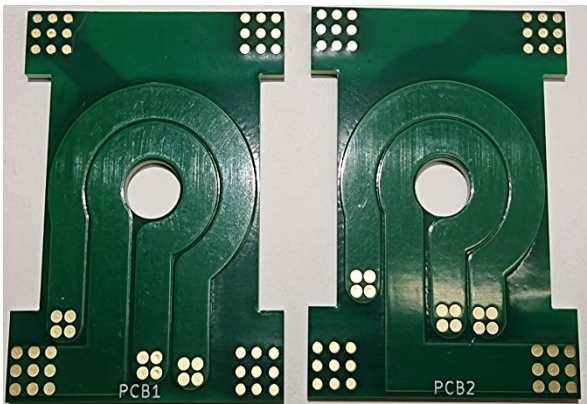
Designed 4-layer PCBs for one primary and one secondary windings
